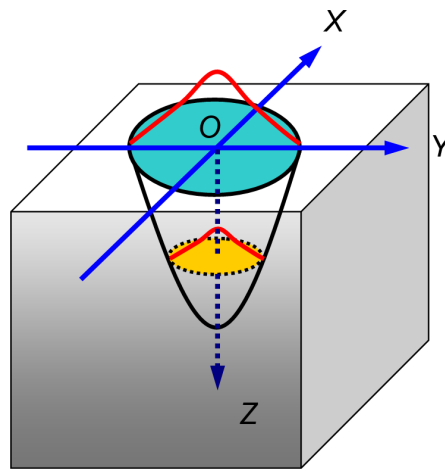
Schematic drawing of heat source model for laser welding
